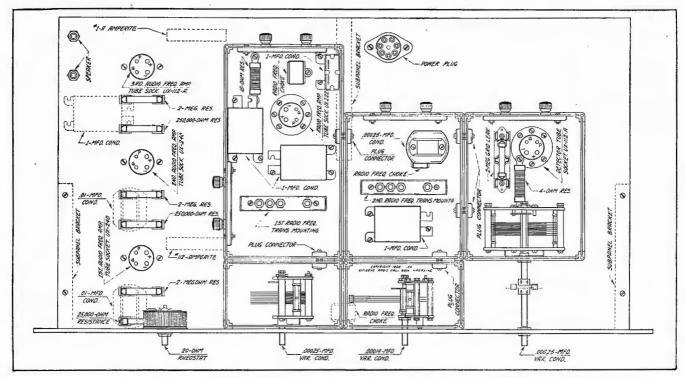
The drawing above gives the builder a clearer conception of how all parts should be mounted on the sub-panel
